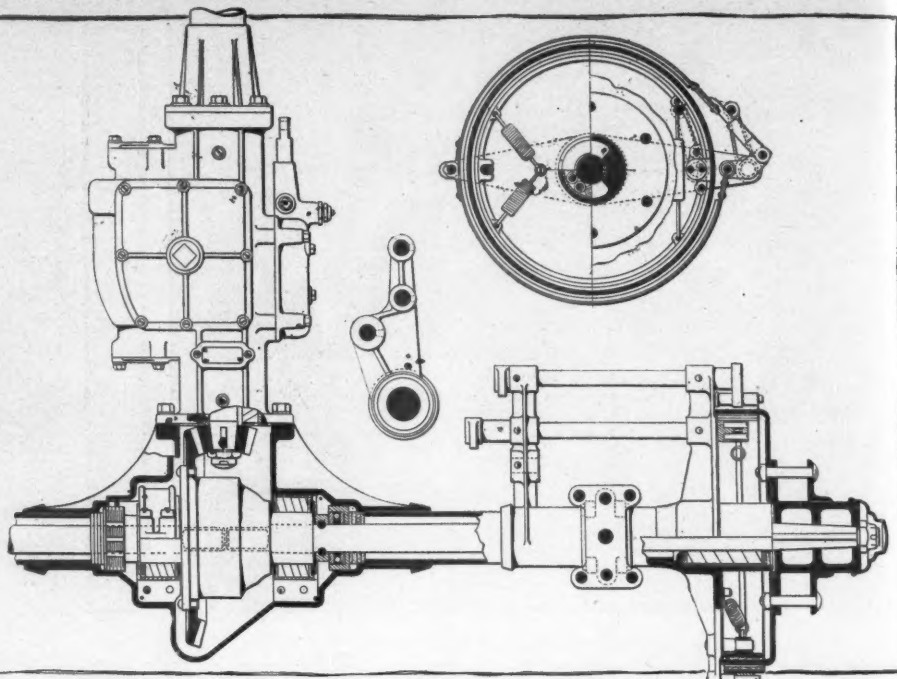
MOON 30 GEARSET AND REAR AXLE, SHOWING REAR AXLE DETAILS
